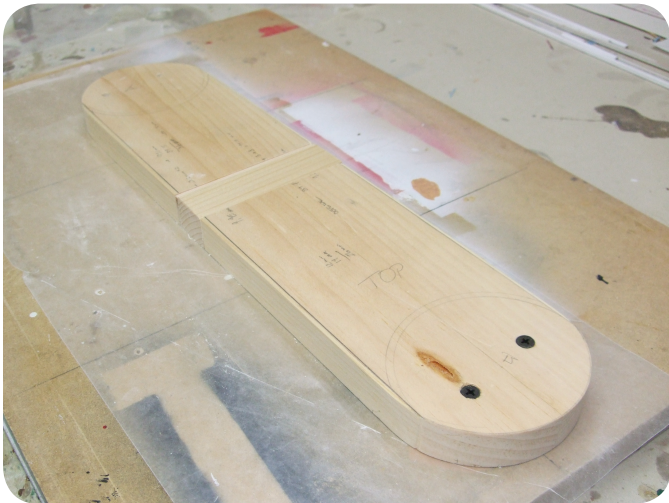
A jig was built onto which laminates could be built up for the turtle deck.
